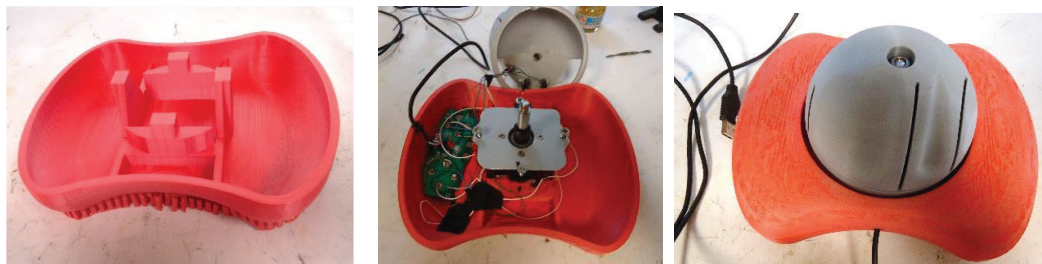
3D printed model of the base, subassembly and the final prototype of the controller.
